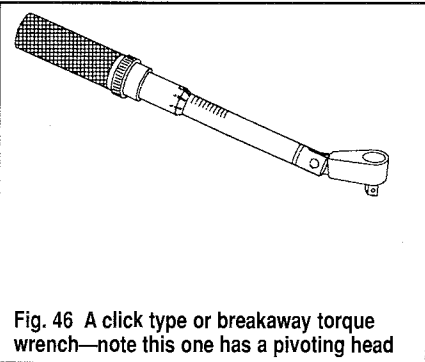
A click type or breakaway torque wrench—note this one has a pivoting head
